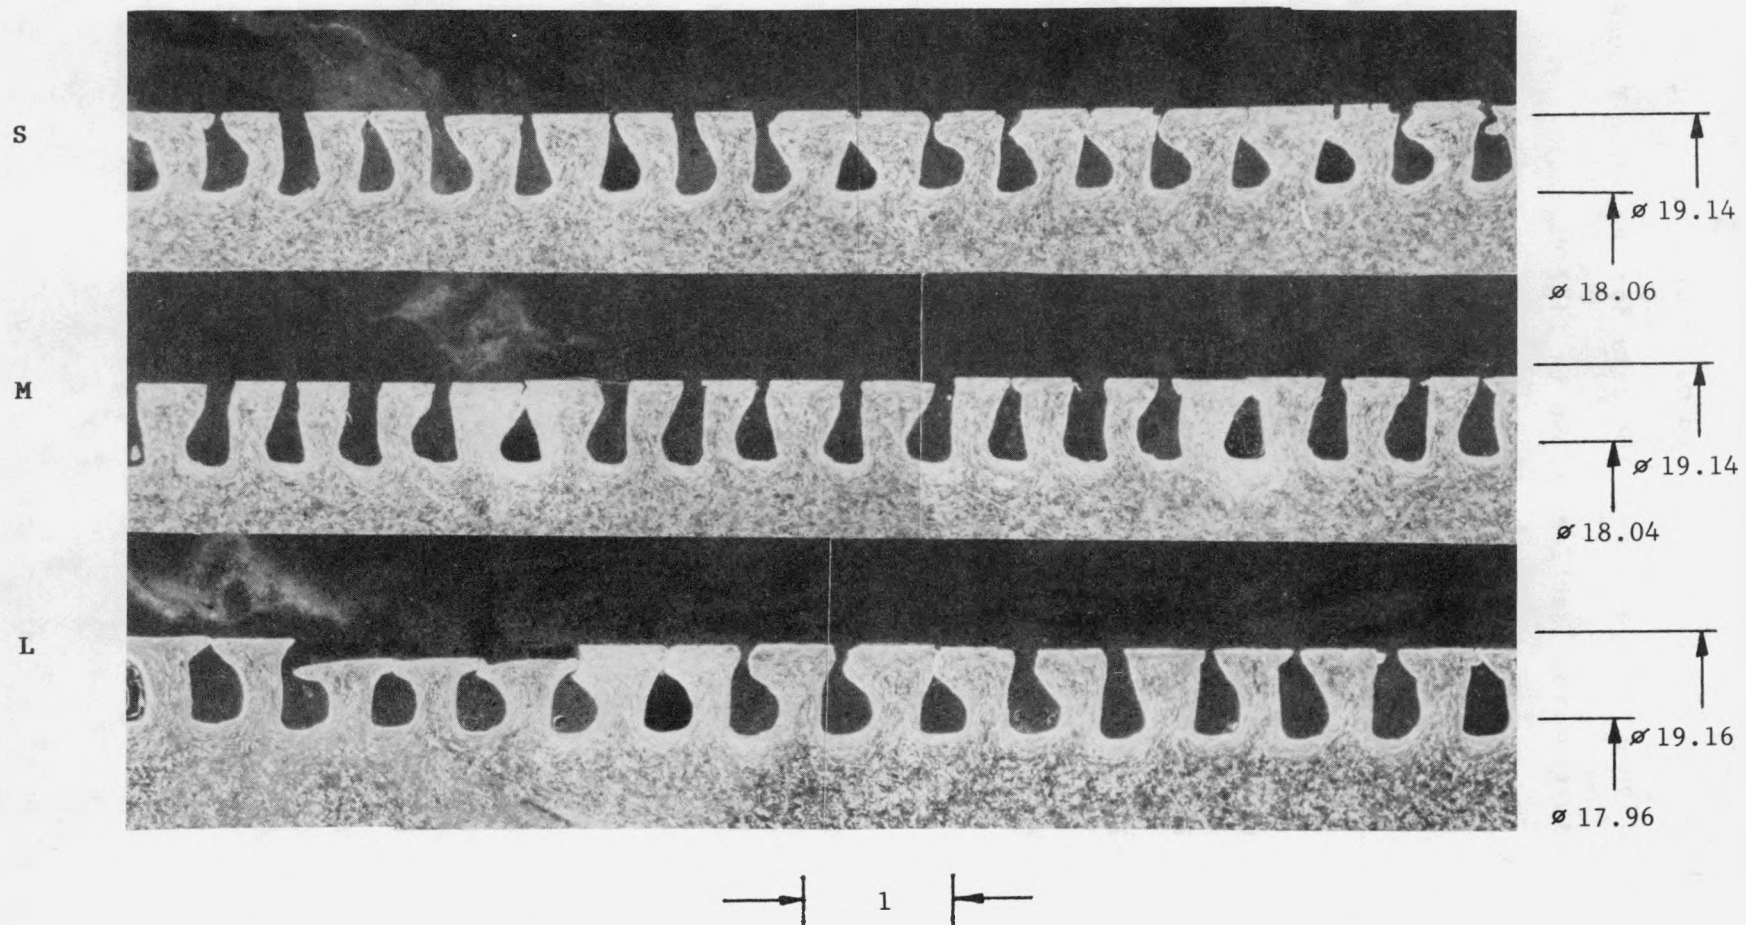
a.: Cross section of the Turbo-B S, M and L cut axially (enlarged 20x)
